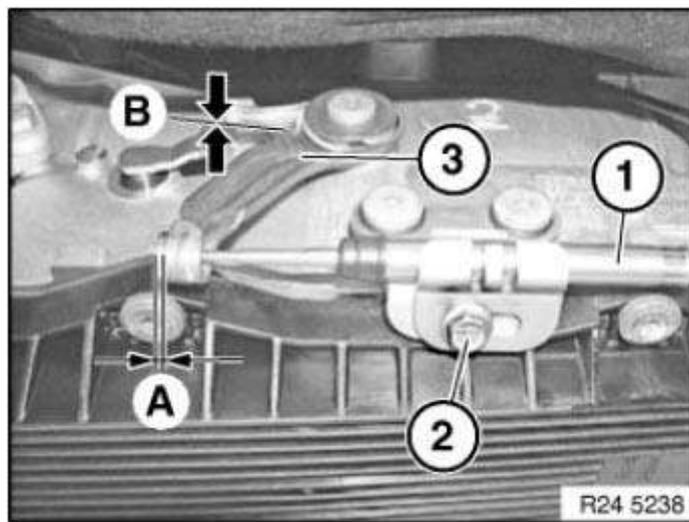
Identifying Adjusting Gear Lever, Cable And Screw
